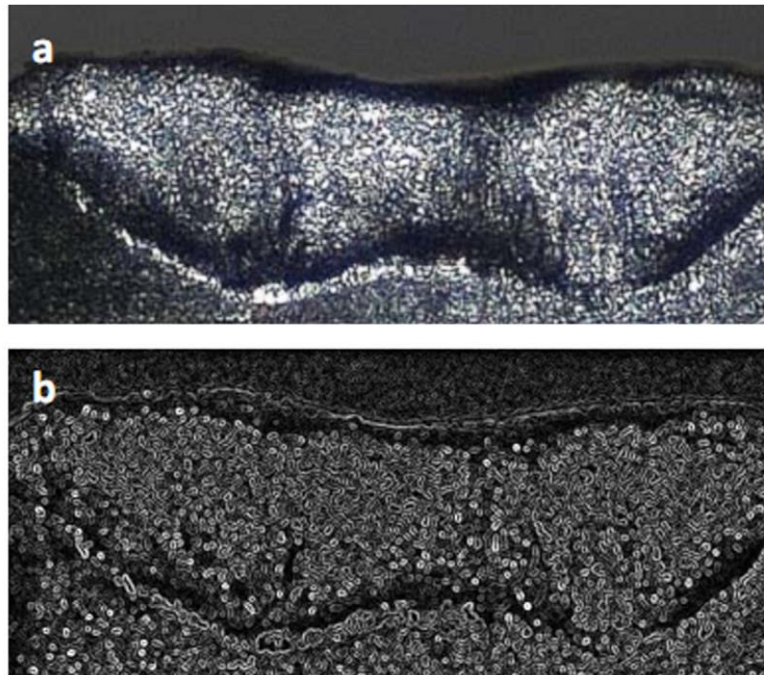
a) tool wear image and b) Canny edge detector [3]
